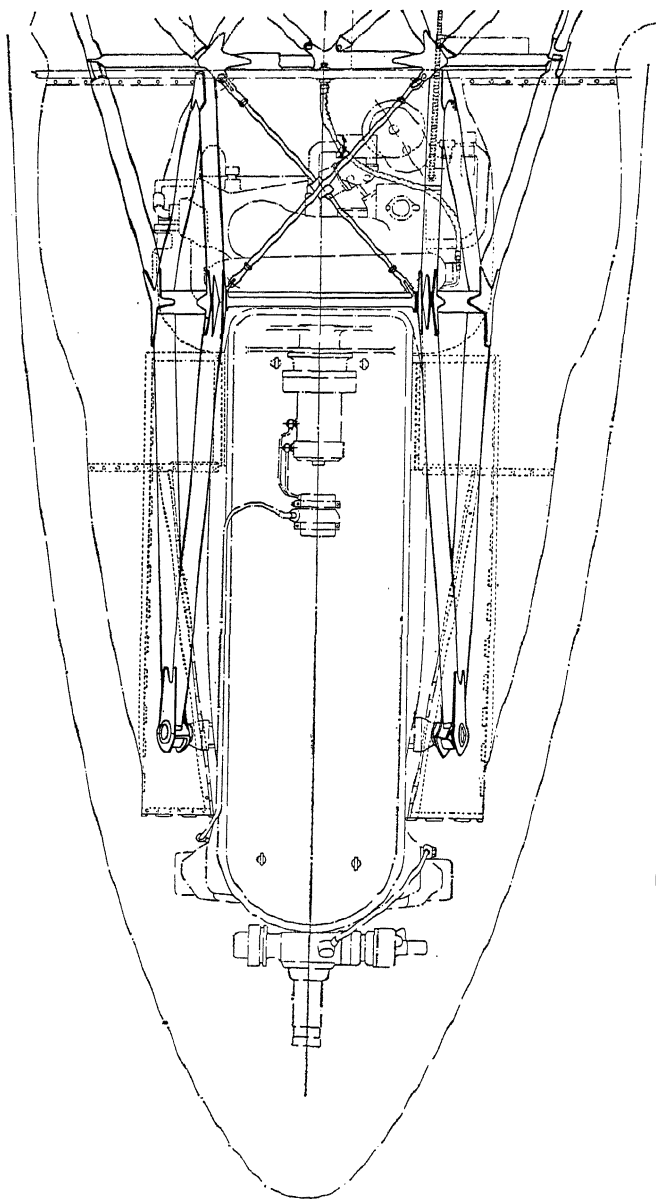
Plan view of Gipsy Twelve installation in aircraft.
